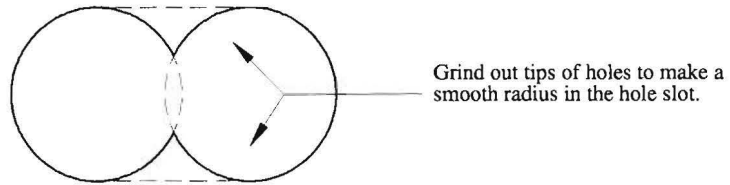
Overlapping holes slotted to remove cutting edges.
